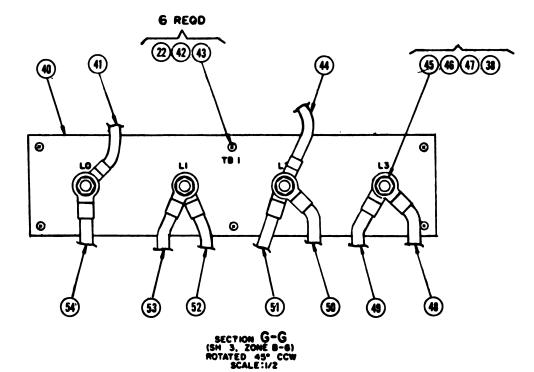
Switchbox Assembly (Sheet 4 of 7)
